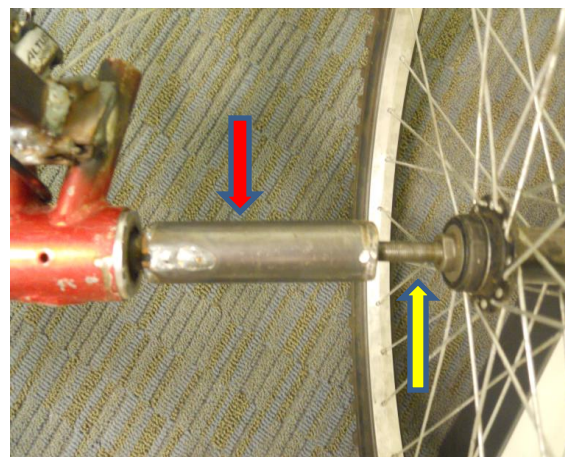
The non-drive wheel was threaded into a sleeve (red) using the wheel's axle (yellow).
